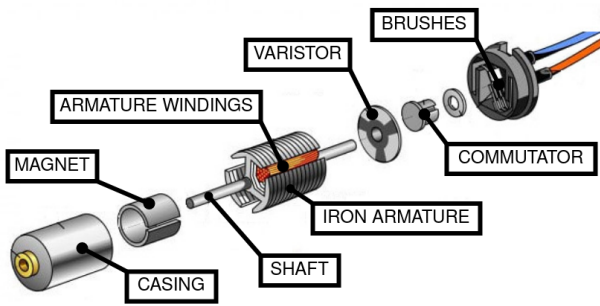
Exploded view of a typical DC drone motor. The changing current through the windings induces mechanical vibrations passing through the metal casing, producing an acoustic hum.
